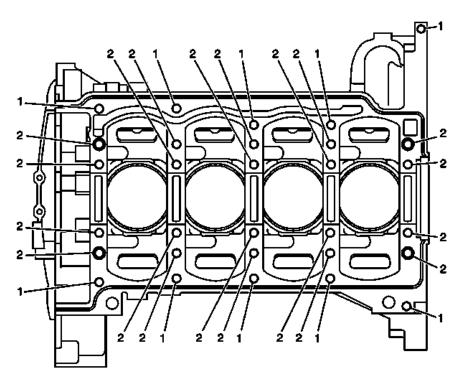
Bolts On Engine Block - Left Side View Courtesy of GENERAL MOTORS COMPANY
